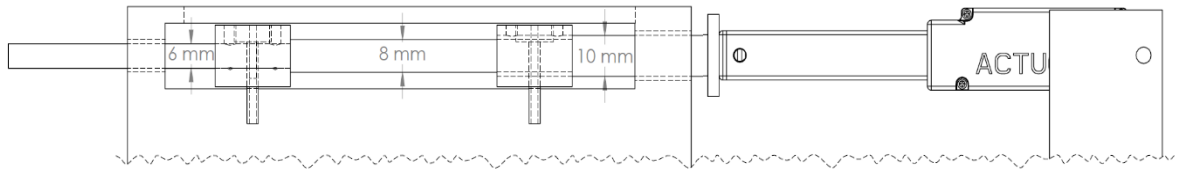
Close up of the pin arm and shaft mechanism. The shaft is machined to change in diameter from 6 mm to 8 mm and finally 10 mm. This creates a 2 mm lip which the Pin Bar can sit against and be fastening with grub screws to prevent the pin arm from sliding backwards during its operation. An Oilite bearing with internal diameter 6 mm was used at the front of the shaft and a 10 mm internal diameter iolite bearing was used at the back to allow the shaft to slide freely with minimal friction.
